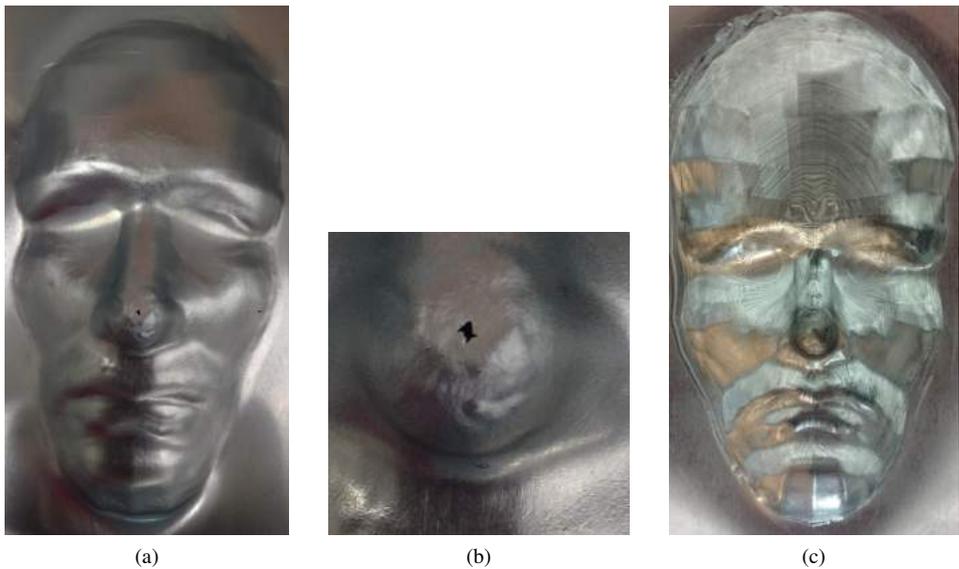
Test 01 second part (a) Final part (b) External fracture detail (c) Internal part detail
